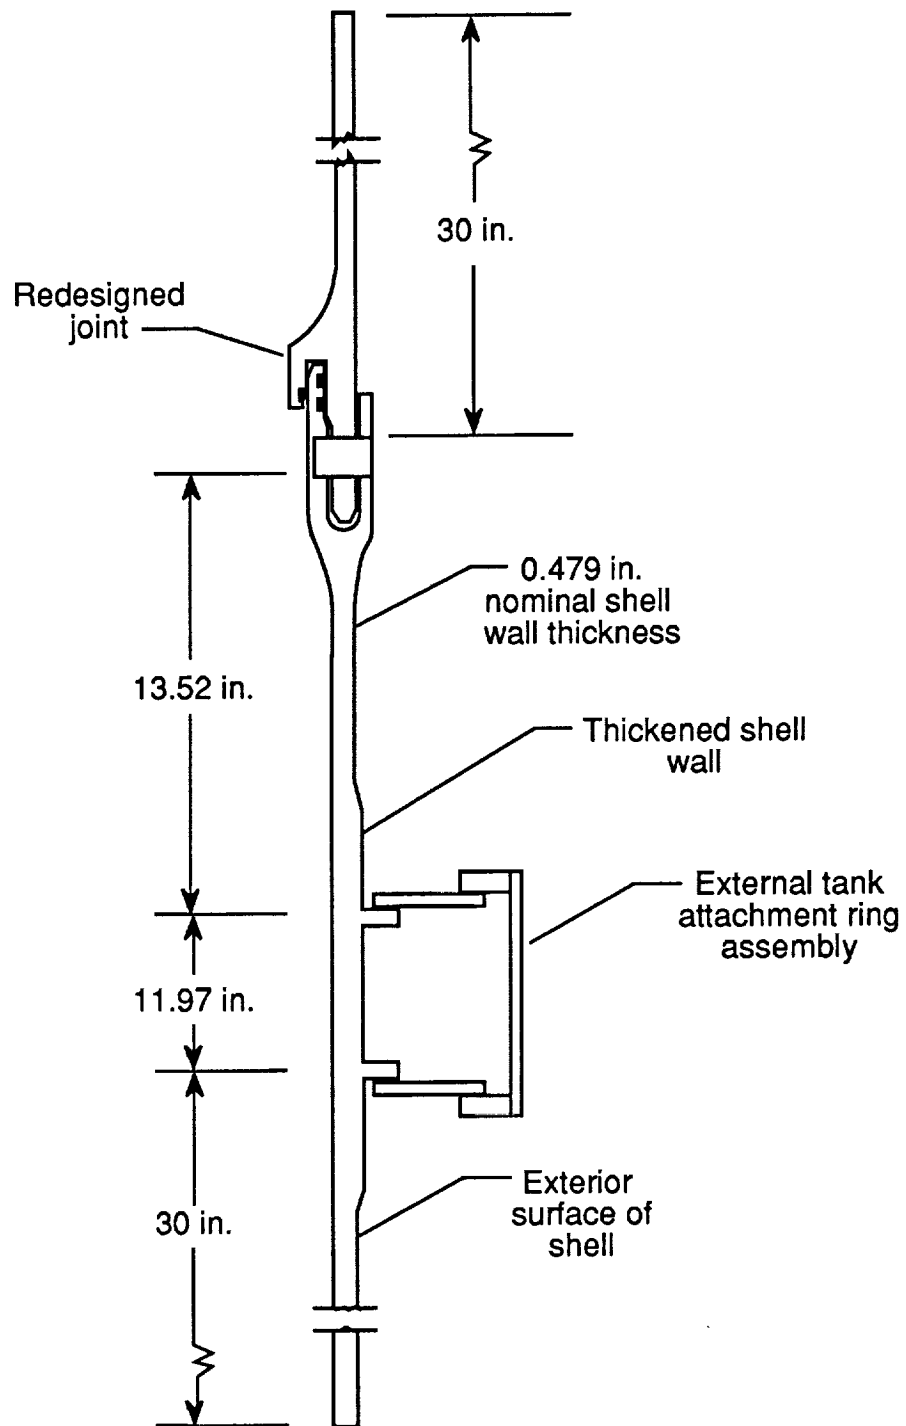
External tank attachment ring assembly and redesigned joint (not to scale).
